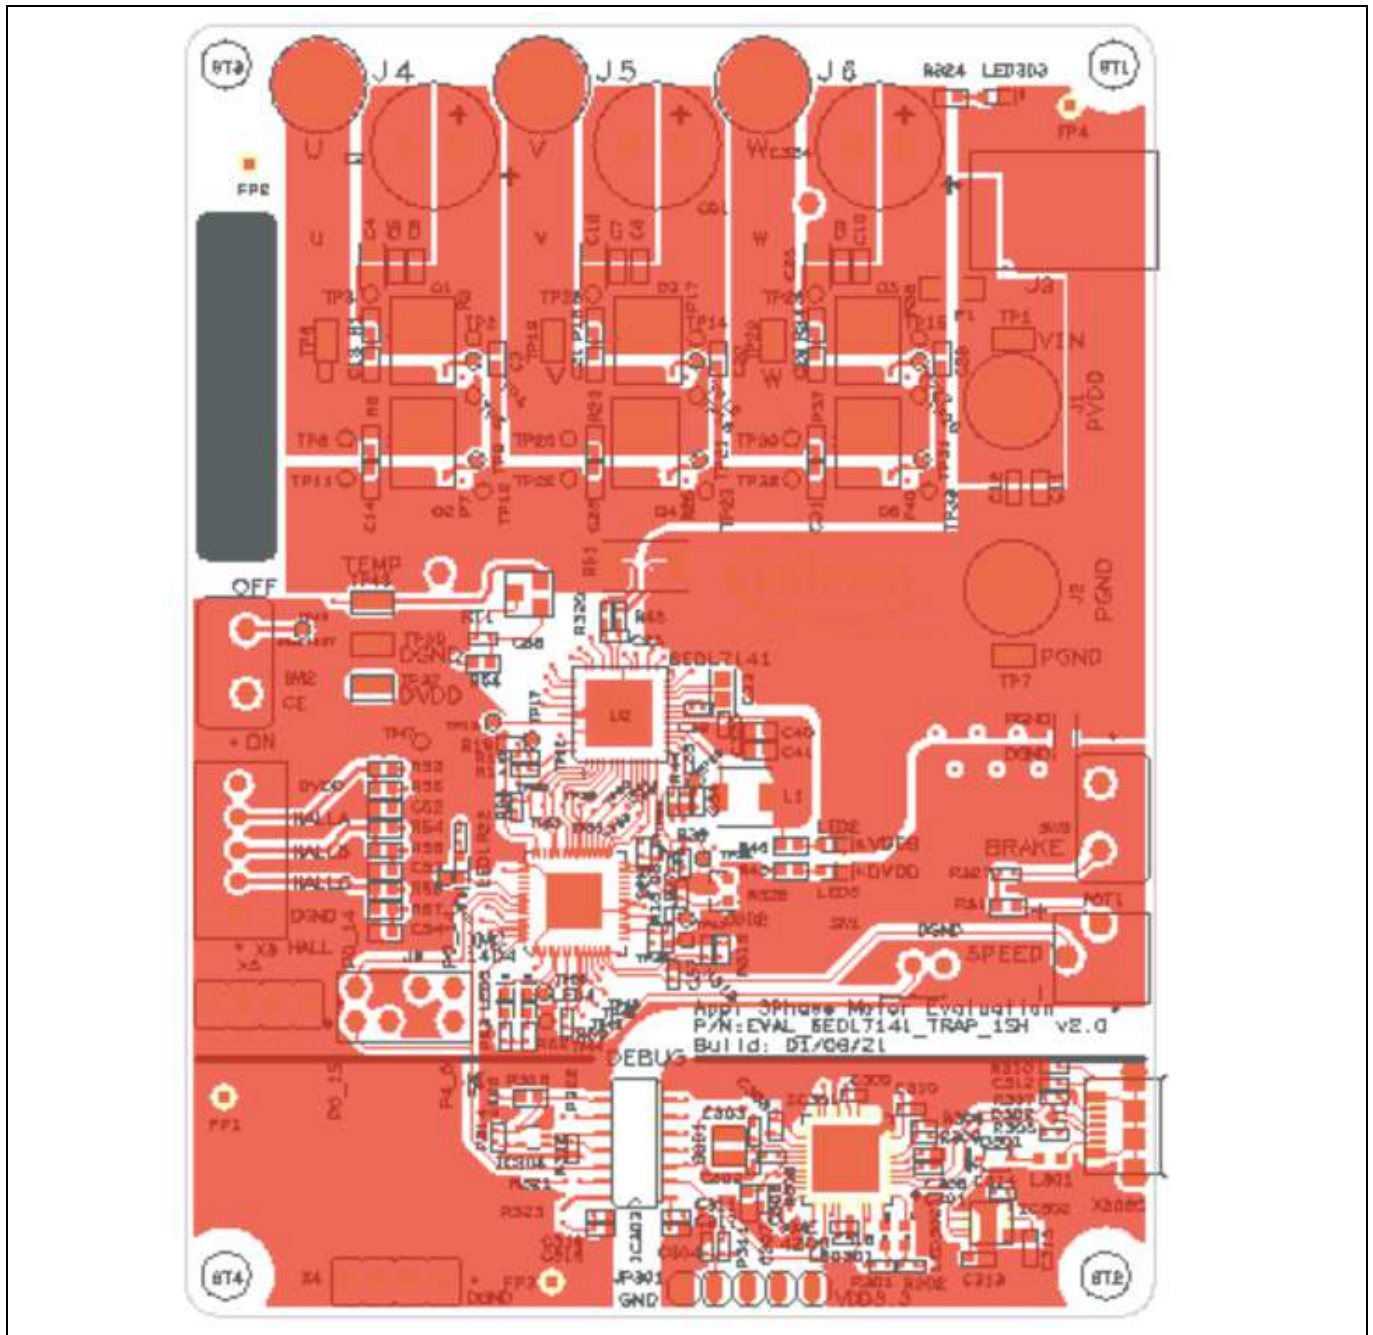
EVAL\_6EDL7141\_TRAP\_1SH PCB top layer with silkscreen
